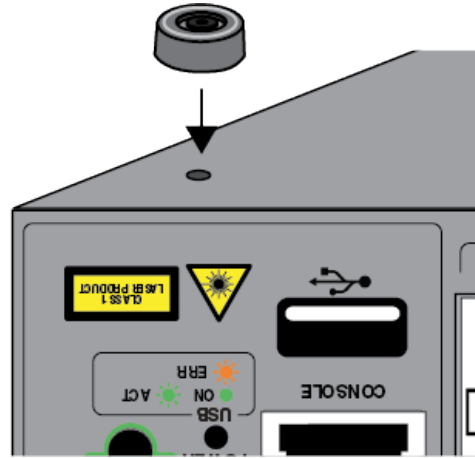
Placing the Bumper Foot on a Base Corner Hole
